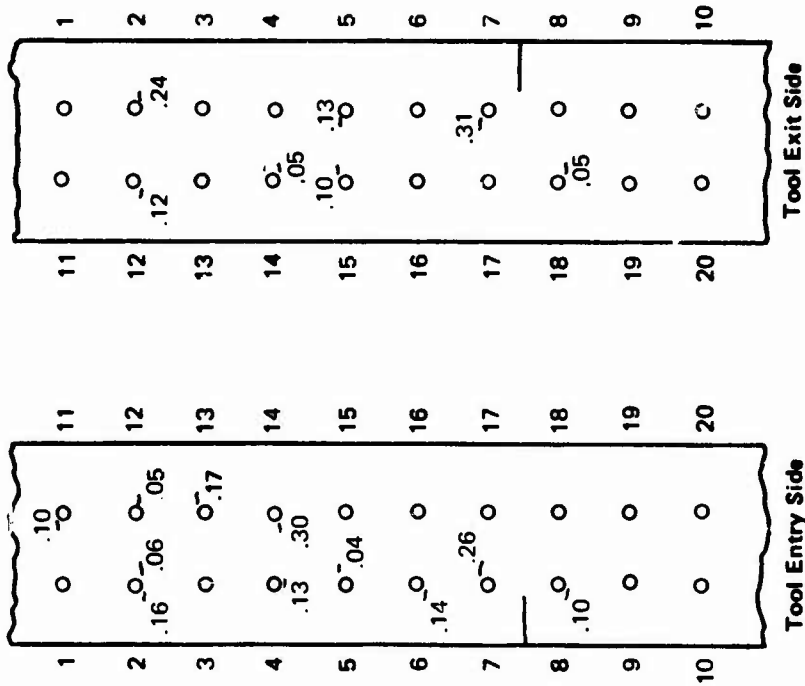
Fatigue Crack Initiation Sites in Usage Simulation Specimen No. 2A17 (Fig. 2, Load Transfer, Type II) Detected During Testing and After Disassembly
